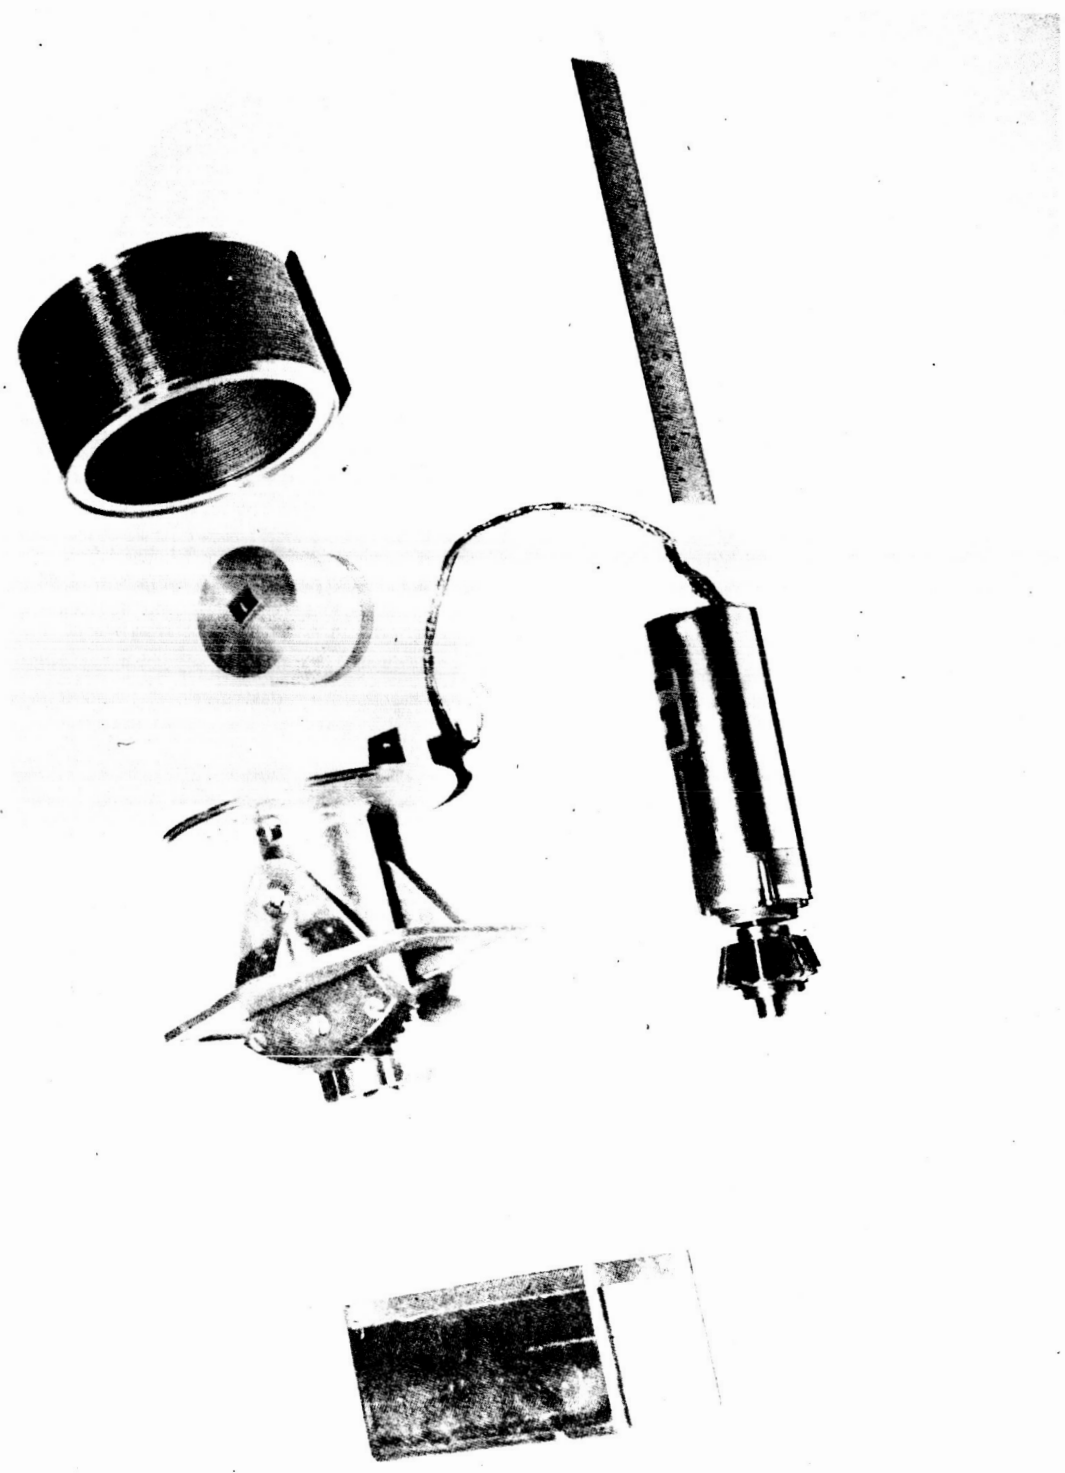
Preprototype Steering Actuator, Disassembled
